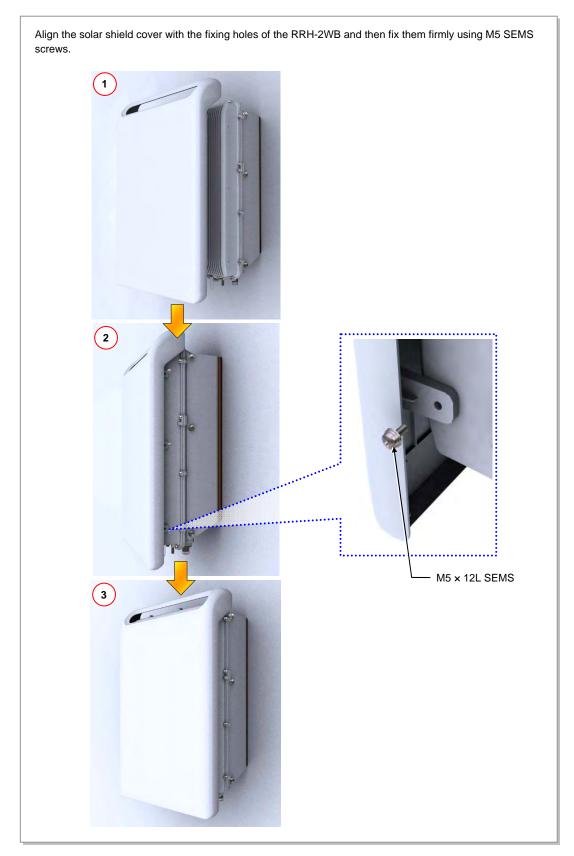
Fixing the RRH-2WB\_Wall Type (3)
